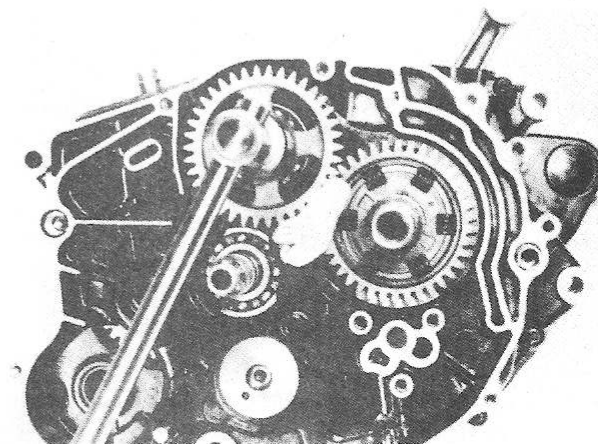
B.46 Removing the balancer shaft driven gear (note the rag wedged in the gear teeth to keep the shaft from turning) (Sec 24)
